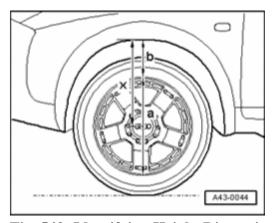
Identifying Height Dimension Courtesy of VOLKSWAGEN UNITED STATES, INC.
